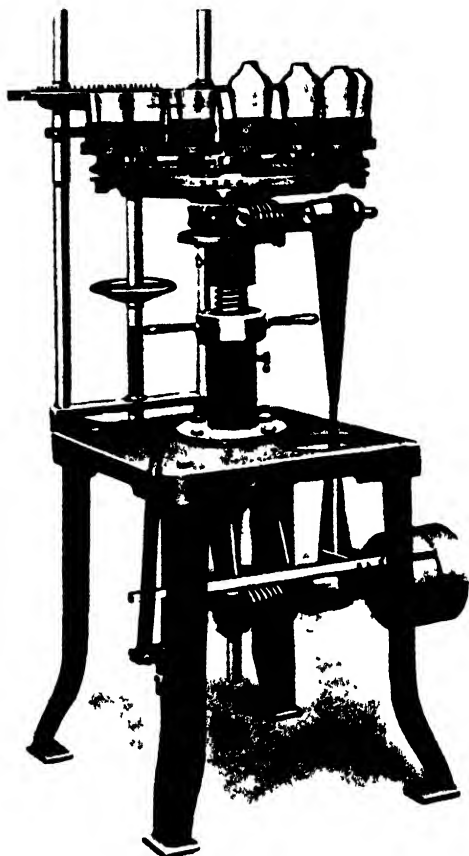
AN AUTOMATIC CRACKING-OFF MACHINE.
